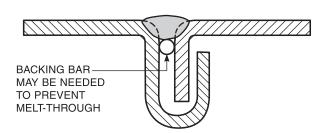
Single-Flare-V-Groove Weld (see 2.3.4.2)
